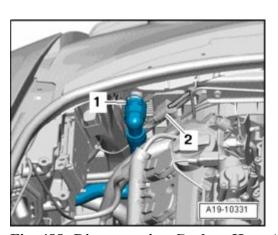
Disconnecting Coolant Hose At Top Left Of Radiator & Removing Lid Lock Electrical
